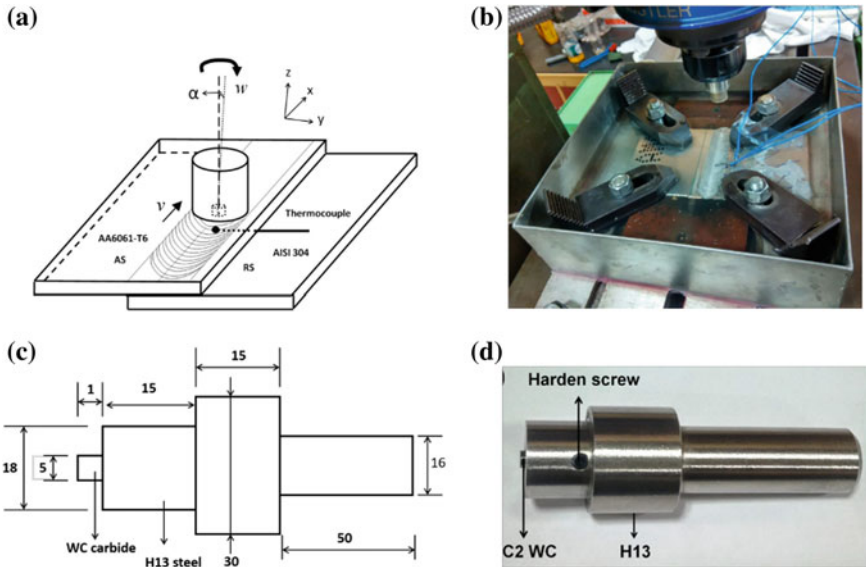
a Schematic of FSLW, b actual experimental set-up of UwFSW, c schematic of FSW tool, and d actual FSW tool
